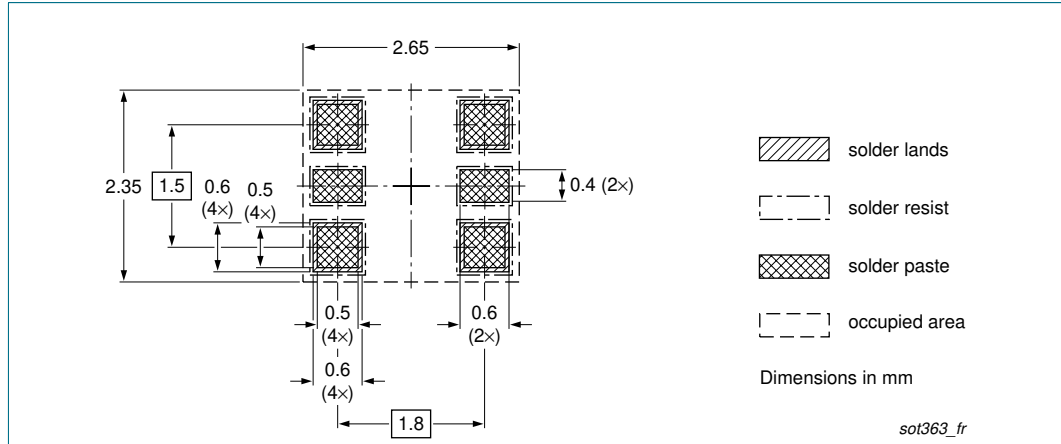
Reflow soldering footprint SOT363 (SC-88)
